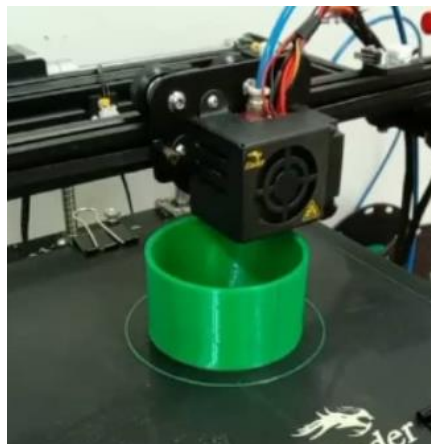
3D printing progress of the Cup Placement Mechanism.
